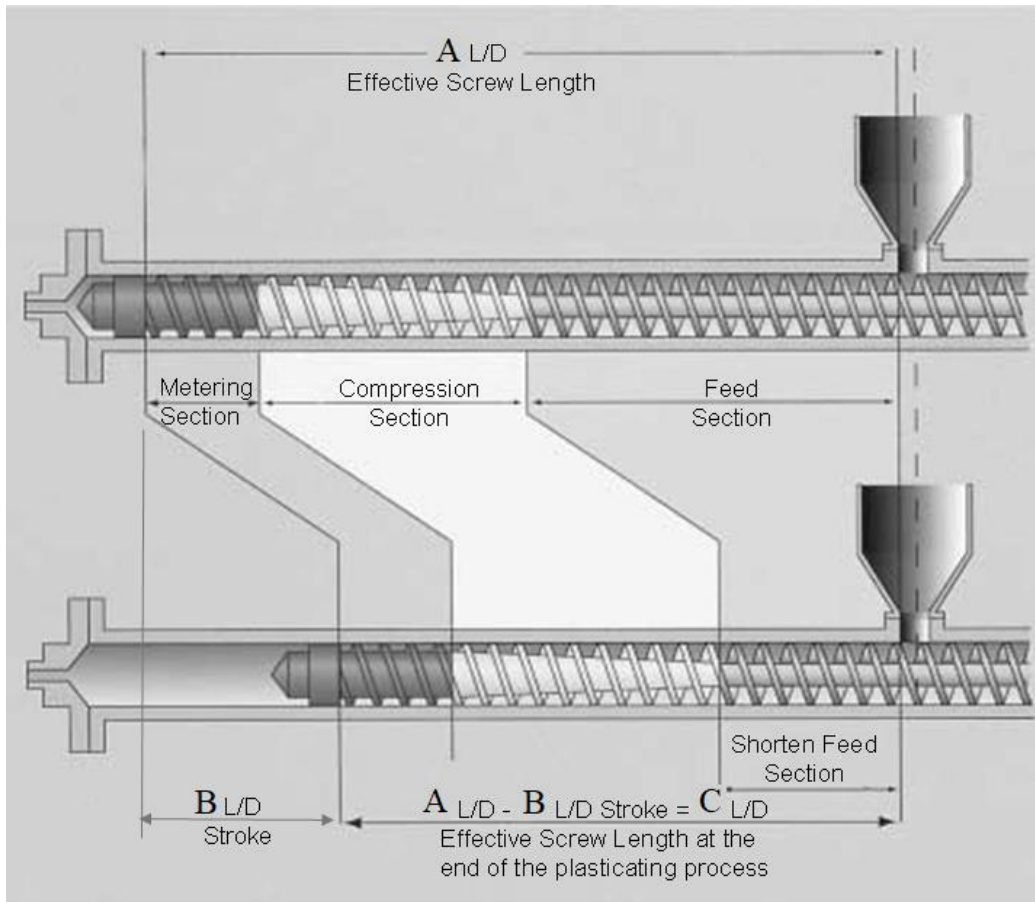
1. Schematic representation of earlier screw designs used in single-screw extrusion (SSE) on top and in injection molding (IM) at the bottom. Notice that earlier IM screws had shorter feed section. Adopted from Womer (2011).
